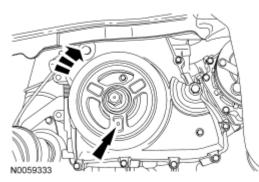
Locating Hole On Crankshaft Pulley And Turning Crankshaft Clockwise
